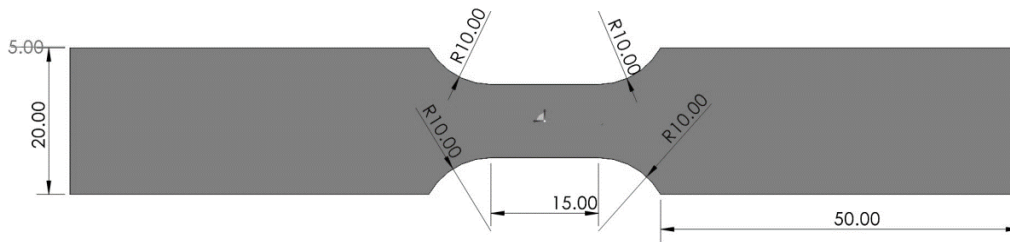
Dimensional details of the fatigue test specimen as per E606M
